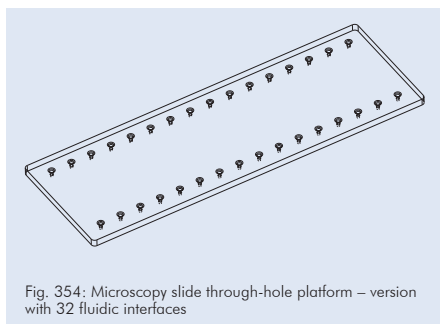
Microscopy slide through-hole platform – version with 32 fluidic interfaces
